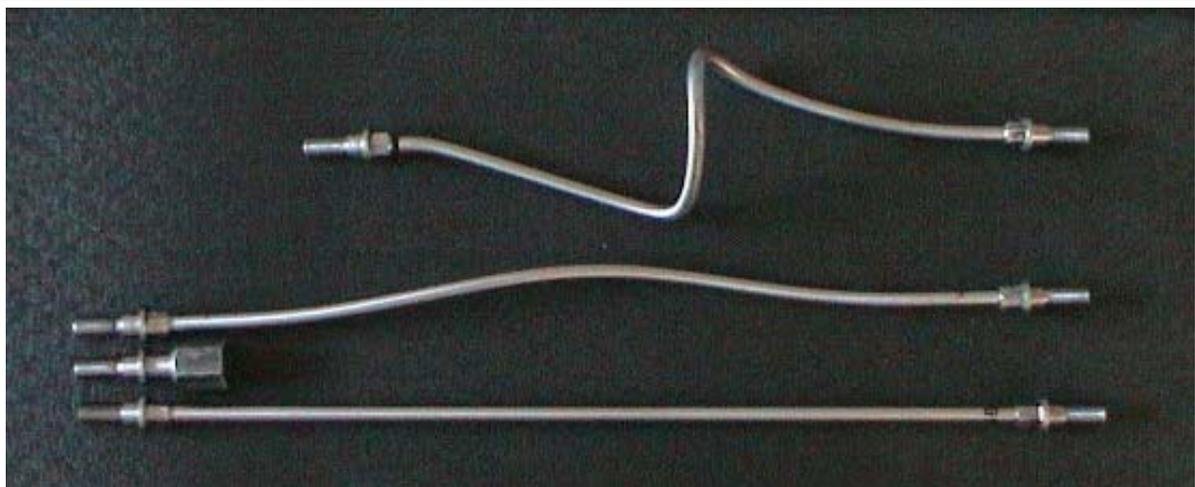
Bottom to top: Straight flex shaft, flex shaft thread test sample, slightly bent flex shaft, severely bent flex shaft.
